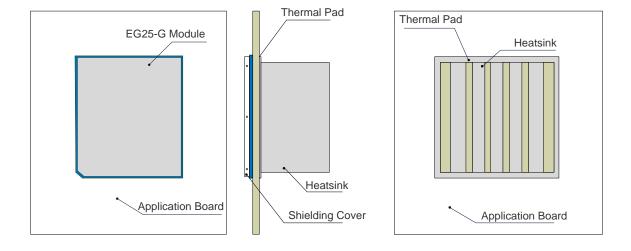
Referenced Heatsink Design (Heatsink at the Backside of Customers' PCB)
